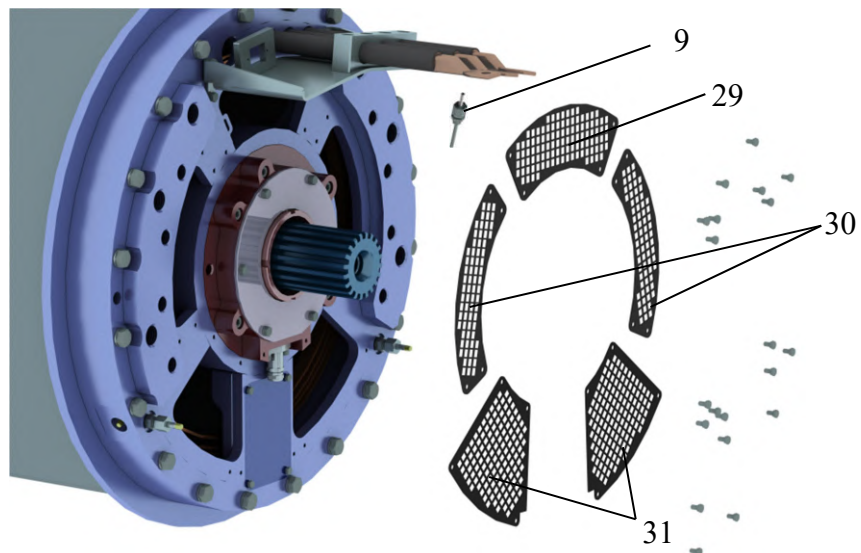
Dismantling of Ventilation Grilles and Bearing Temperature Sensor from the Bearing Shield (Brake Side)
